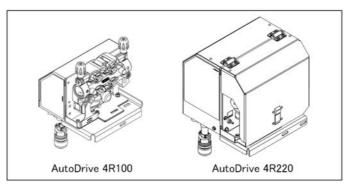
(a) Figure of appearance of the wire feeder
